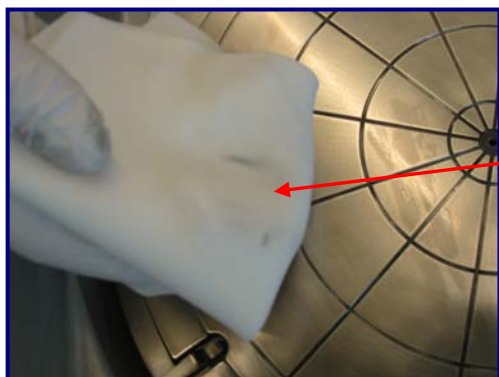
Particles removed by using [HT4790](#) UltraSOLV® Foam Wiper on surface of heater assembly
